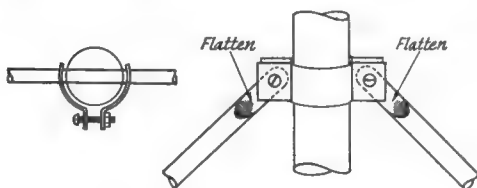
Method of mounting suspension braces to a pipe mast is shown at the right. The braces are flattened at the ends and bolted to semicircular clamps formed from aluminum sheet. A method of mounting elements on a boom is shown at the left. Elements go through holes drilled through the boom, and are held tight by the pull-down clamps as shown. The clamps can be made from sheet aluminum.
